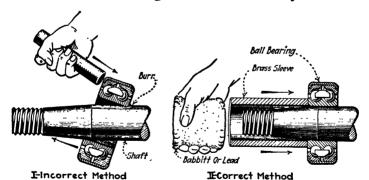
Illustrating the incorrect and the correct method of putting ball bearings on a shaft.
